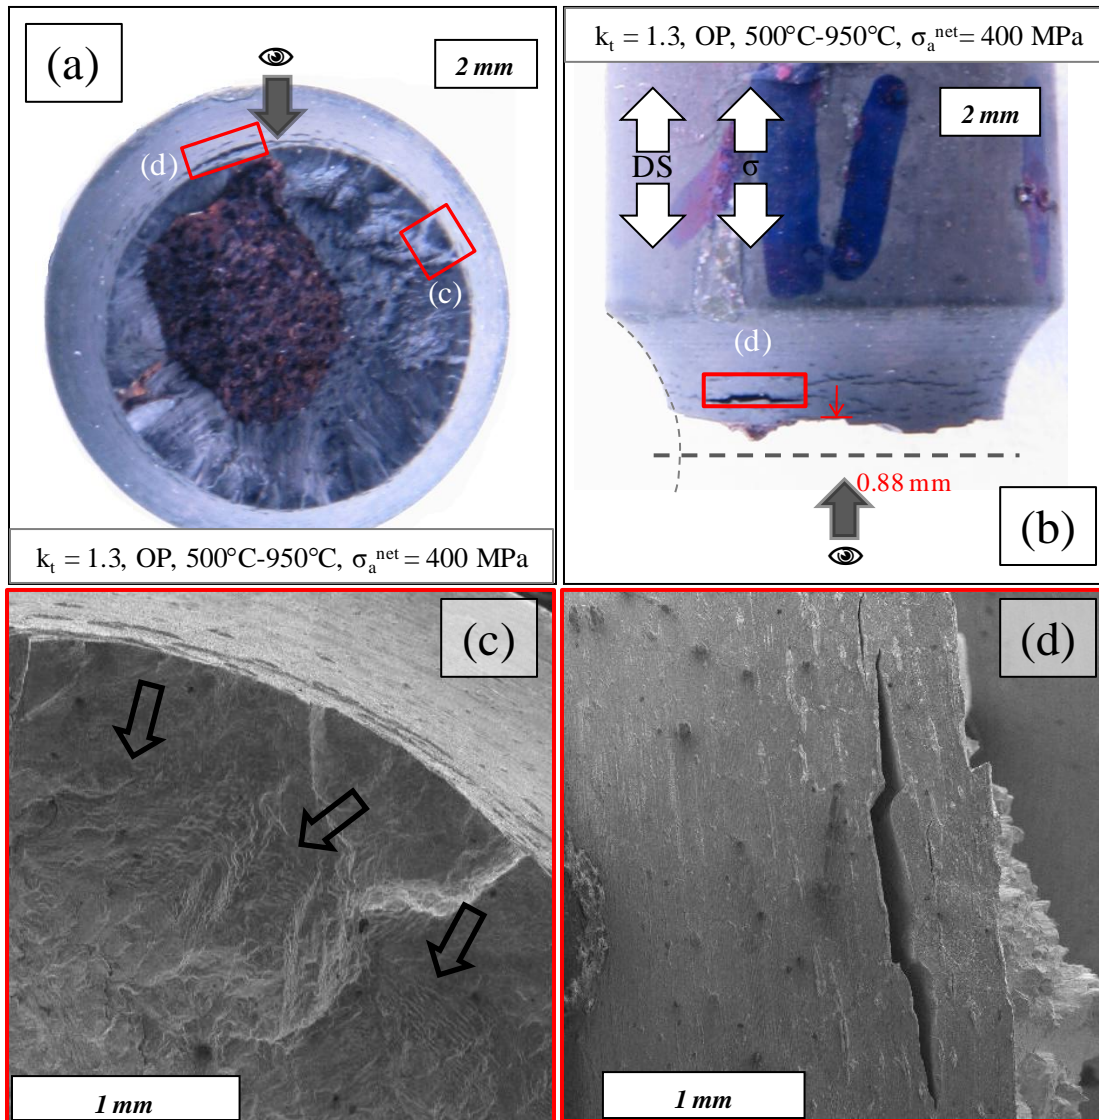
Fractured OP TMF test specimen. (a) Top view indicating multiple sources of surface crack initiation (b) side view showing initiation away from notch root and multiple secondary cracks (c) striations indicative of fatigue crack growth inward from surface initiation (d) surface initiation of secondary crack.
